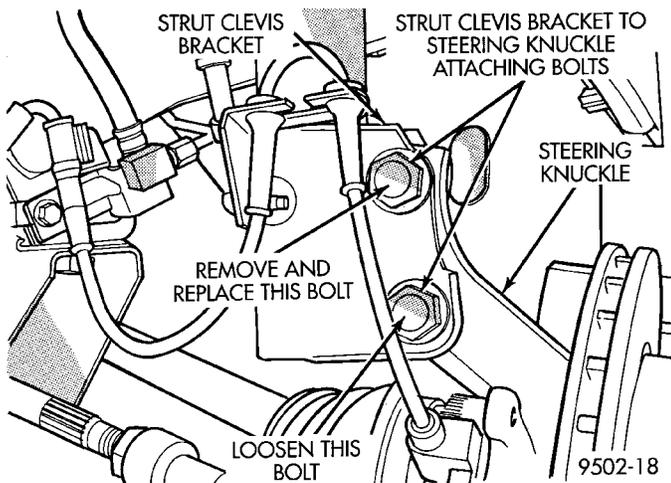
Front Strut Clevis Bracket To Steering Knuckle Attaching Bolts
